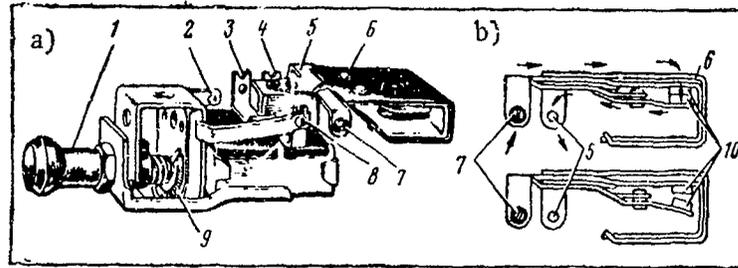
Model P44 Central Light Switch Assembled: a, switch, b, operating diagram of bimetallic heat fuse; 1, knob, 2, terminal for connection of dash light wire, 3, terminal for connection of foot dimmer switch wire, 4, terminal for connection of parking light wire, 5, terminal for connection of wires to stop signal, portable lamp jack and cabin light, 6, bimetallic heat fuse, 7, power supply terminal, 8, terminal for connection of tail light wire, 9, rheostat, 10, fuse contacts.
